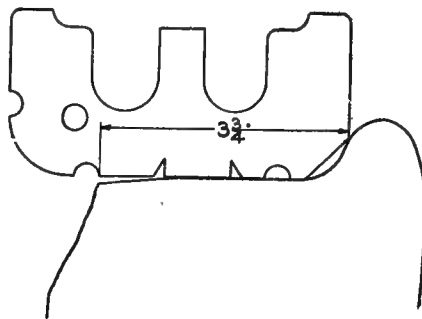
METHOD OF GAGING CHIPPED RIMS.
